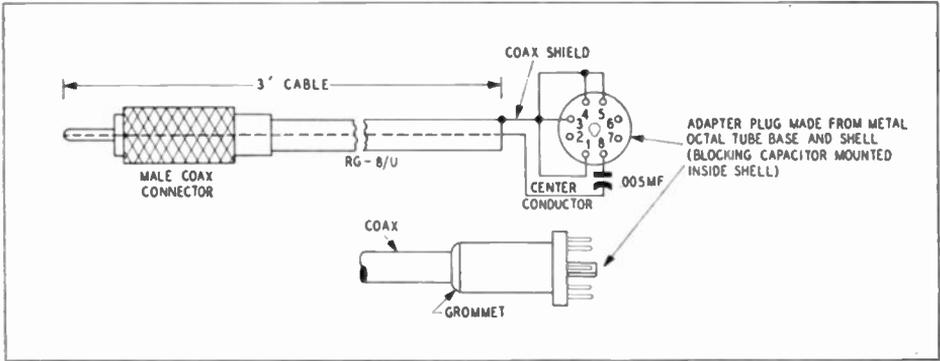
Construction and Wiring Details of Output Cable and Adapter Plug
